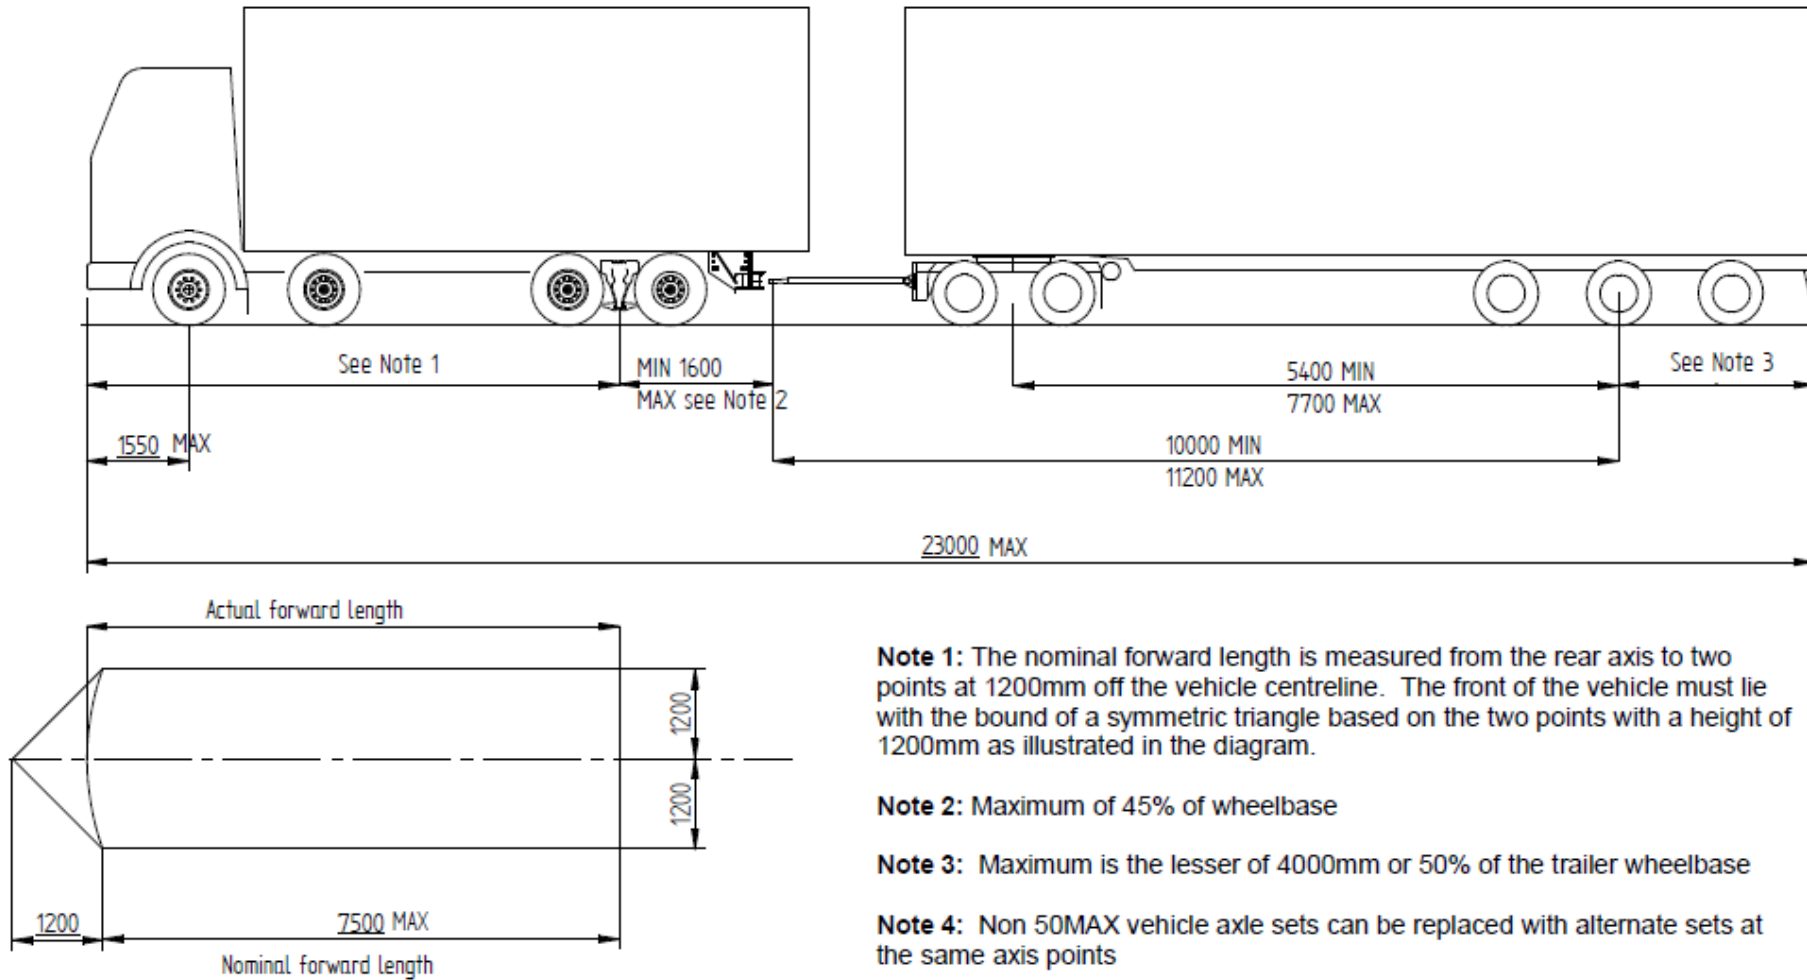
Proposed new 23m truck and long trailer pro-forma design with 1600mm minimum hitch offset.
